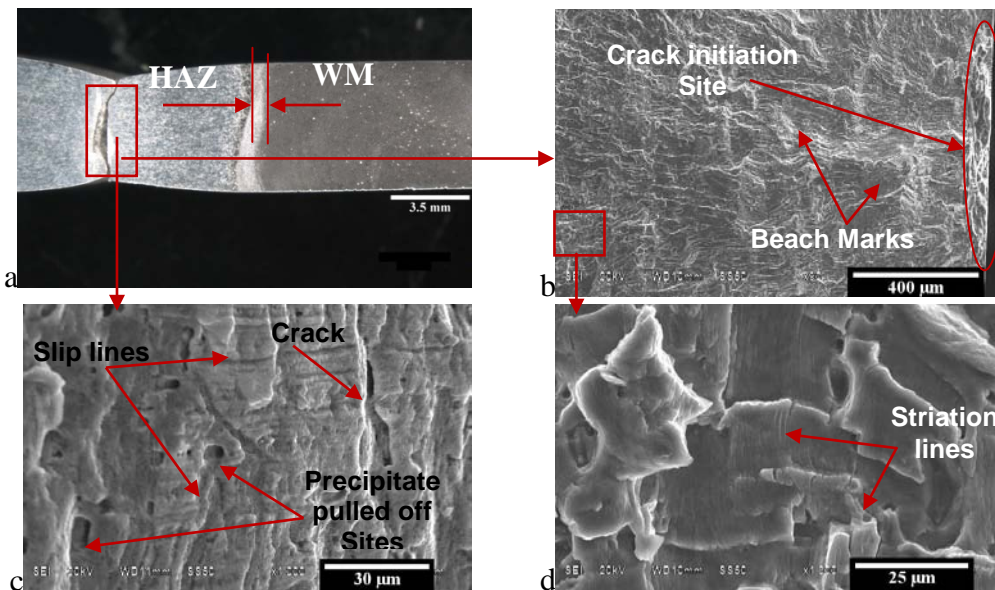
Fatigue failure of 6061/ER5356 weld, a) fracture in HAZ, b) crack initiation site, c) crack initiation from free surface and d) propagation of the crack
